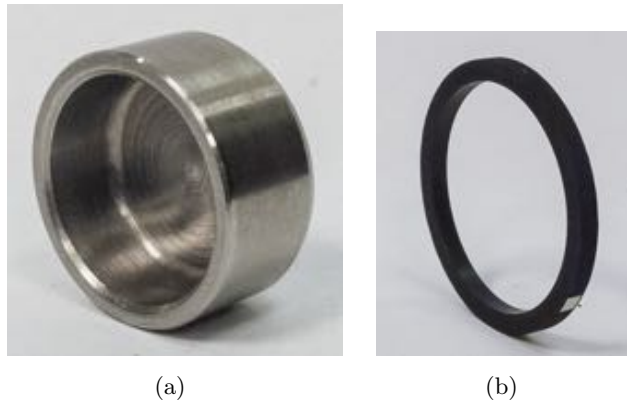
Brake components of the new caliper assembly: (a) Wilwood piston with diameter of 28 mm, (b) Wilwood square cross-sectional seal (internal diameter of 28 mm).
